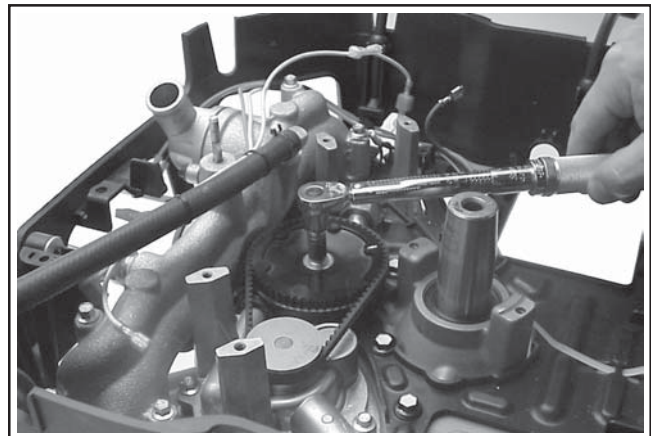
Torquing Mounting Screw of Cam Pulley.
